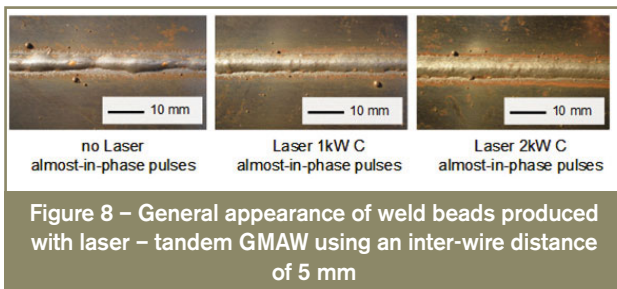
General appearance of weld beads produced with laser – tandem GMAW using an inter-wire distance of 5 mm
